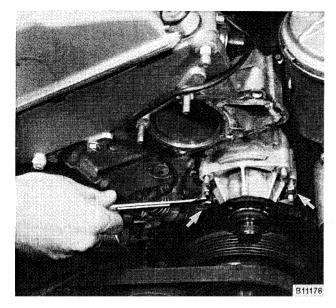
Coolant pump being removed. Thread two M6 bolts (arrows) in evenly to withdraw pump. (Thermostat and hoses have been removed for visual access.)
